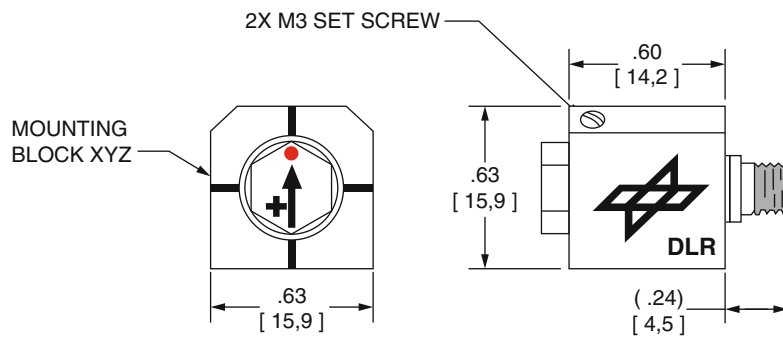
Design of the insulating adapter type 800M166 accommodating the sensor element type 8000M095
